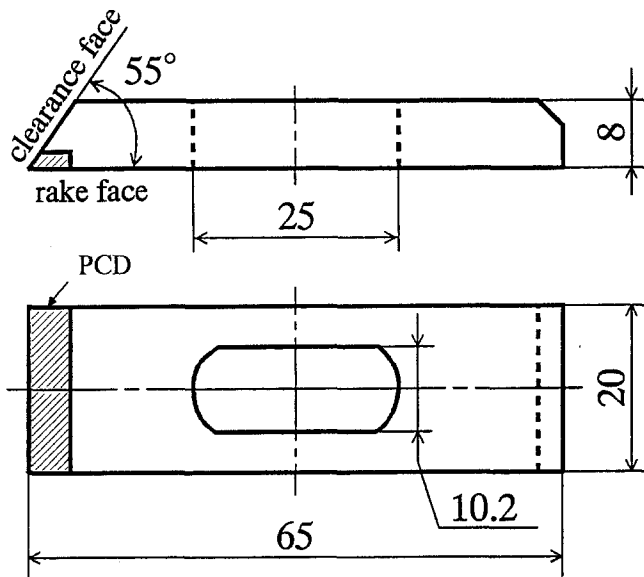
Polycrystalline diamond (PCD)-brazed tool. Dimensions are in millimeters
